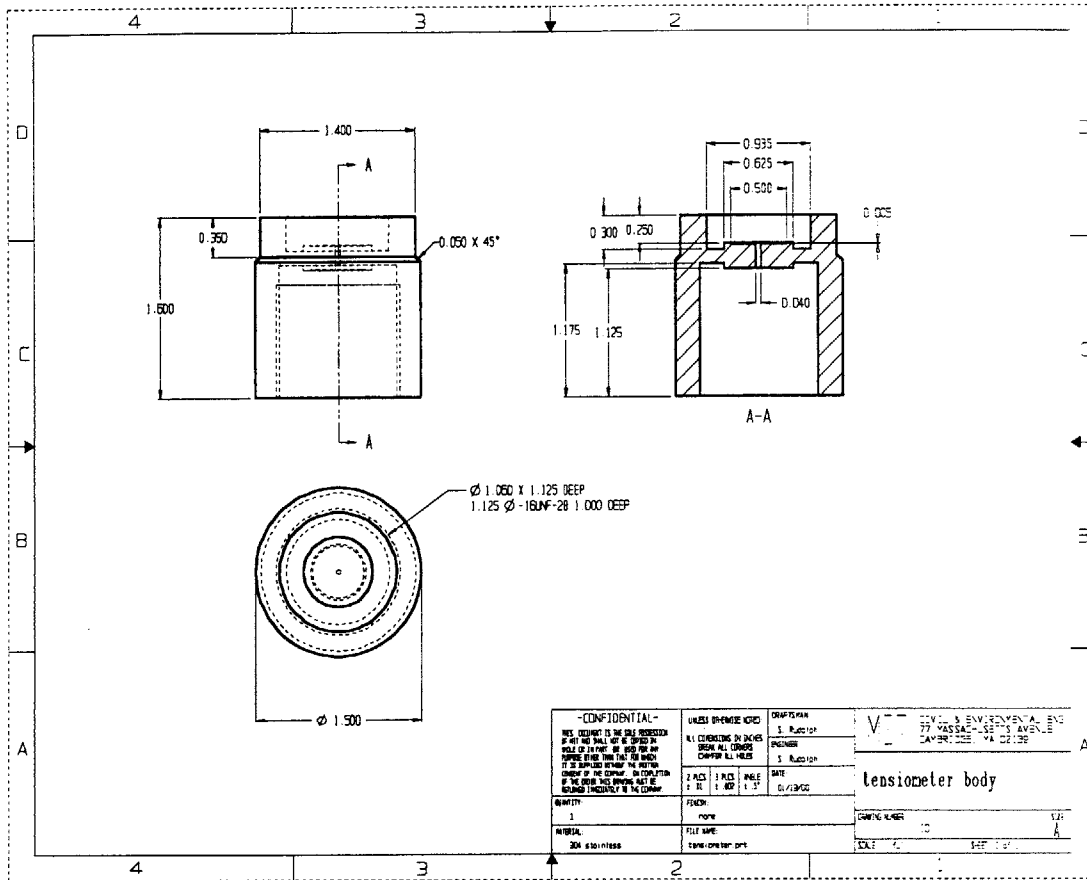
CAD Drawing of version 5.0 of the MIT Tensiometer.
